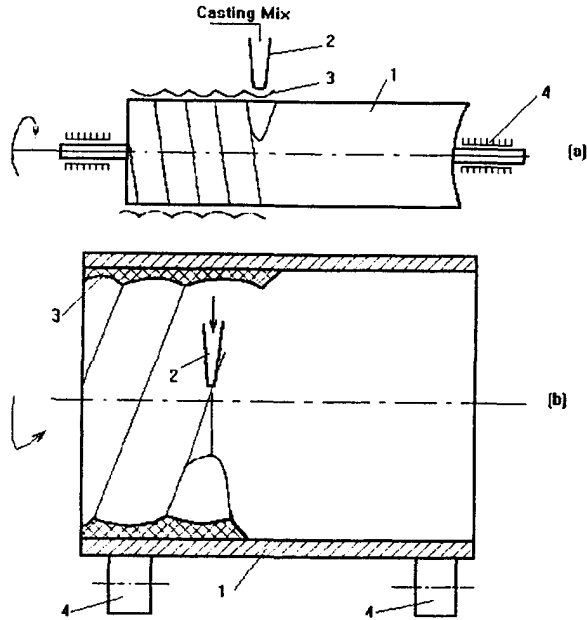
Elementary process flow sheets for molding an internal (a) and an external (b) anticorrosive coatings by the continuous/subsequent filling method: 1 - cylinder (shell) being coated, rotating on supports; 2 - movable filling device; 3 - coating being molded; 4 - bearings.
